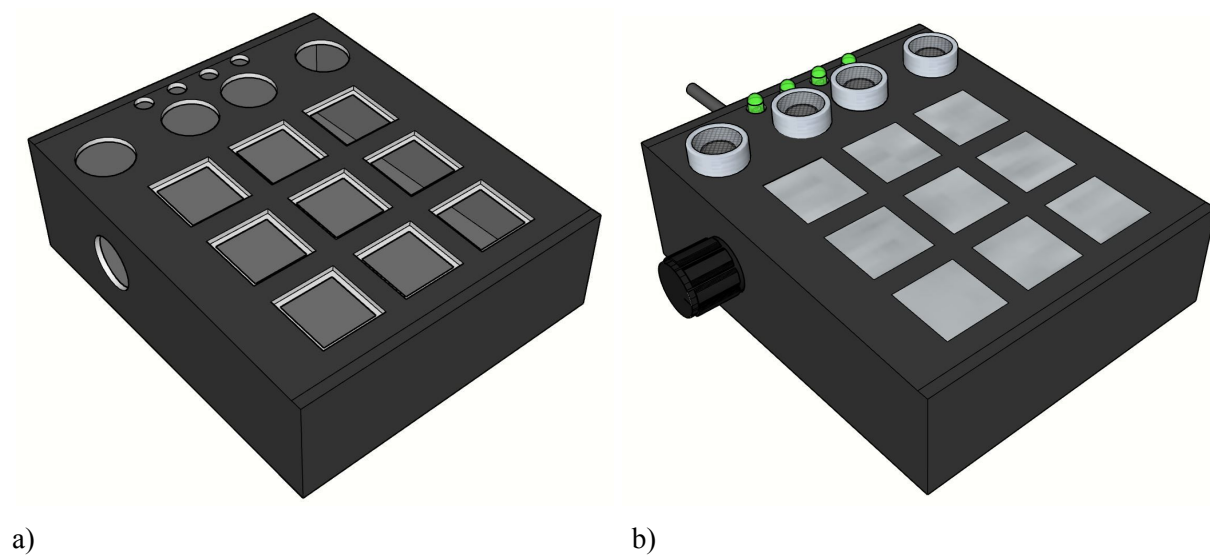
Isometric views of a) PC Buttonpad outer shell for 3D print and b) finished PC Buttonpad containing metallic buttons, LED array, ultrasonic sensors, rotary encoder, and USB cable.
